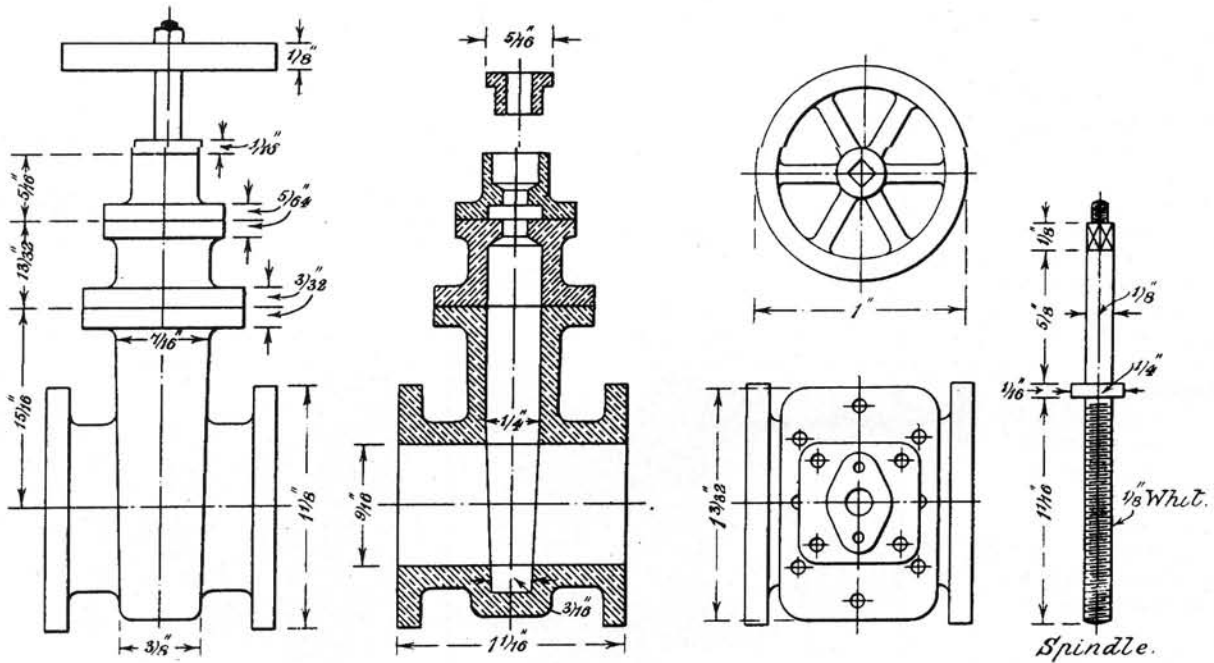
Elevations, Plan and Details of a 9-16th-in. Sluice Valve.
